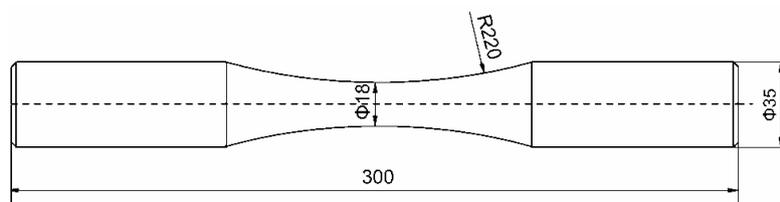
Shape and dimensions of torsion specimen (all dimension in mm)
